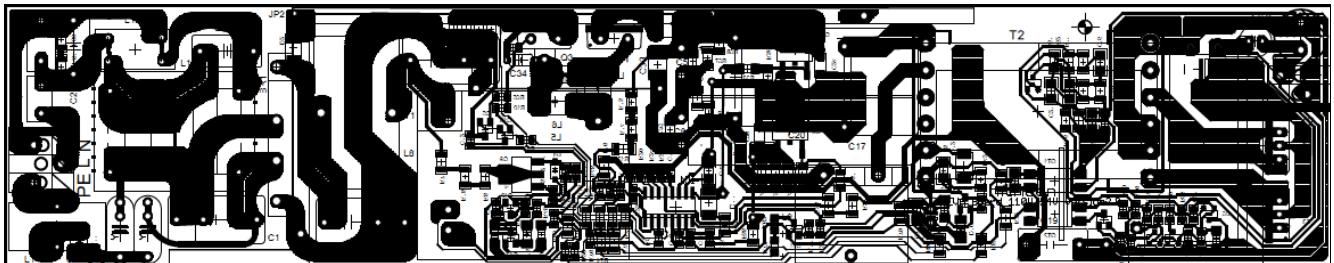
Layout of 110 W / 54 V Power Supply Demo Board (Bottom View)
